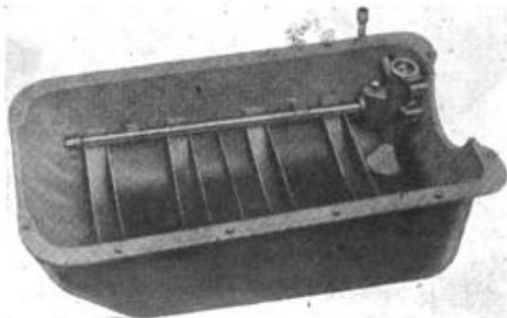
The Oil Pan With Pump and Tube With Holes Through Which Oil is Fed to the Troughs
